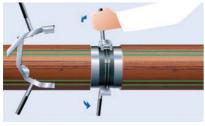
Removing of the weld bead with an external bead remover
